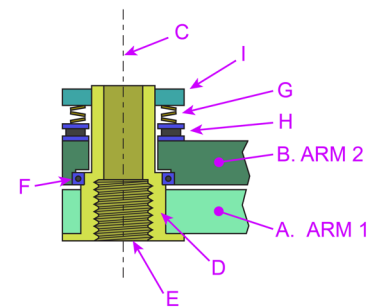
Fab Unit's toolhead pivot joint joins Arm 1 (A) to Arm 2 (B) while allowing rotation about axis C. It consists of a central shaft (D) with threaded tool mount (E), which is fixed to Arm 1. A ball bearing (F) couples the shaft to Arm 2, and is preloaded through disc washers (G), a thrust bearing (H) and a shaft collar (I).
